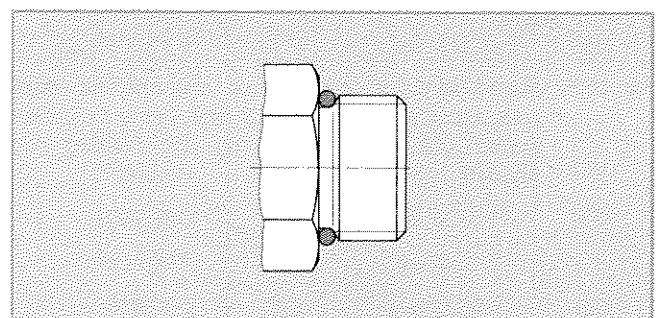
Female port to DIN 3852, Part 3, elastic seal, O-ring closer to thread, reduced tensile force
